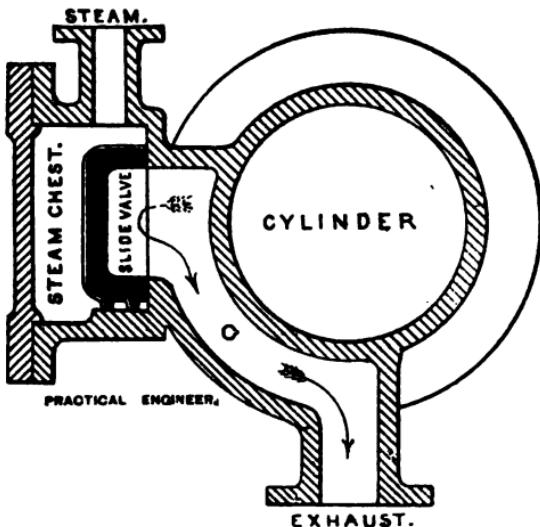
Section through middle of cylinder showing exhaust passage.
